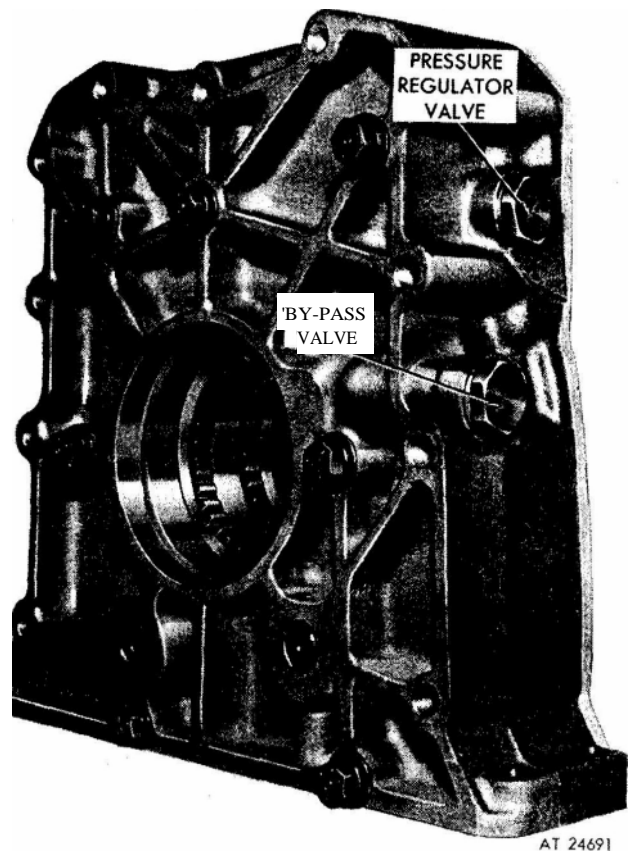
Location of current oil pressure regulator valve—inline engine shown.
